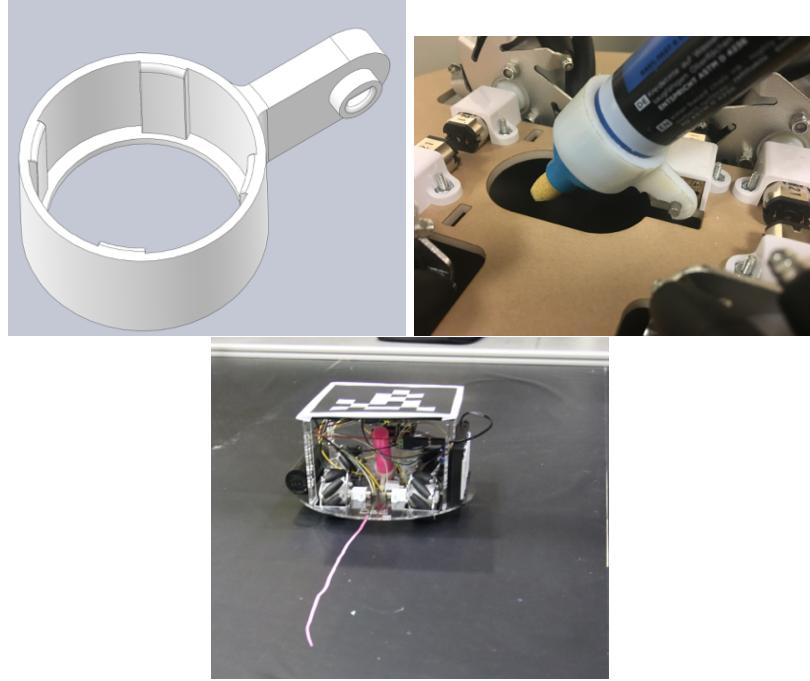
Marker Holder (left), Writing Assembly (middle), Robot Drawing (right)
